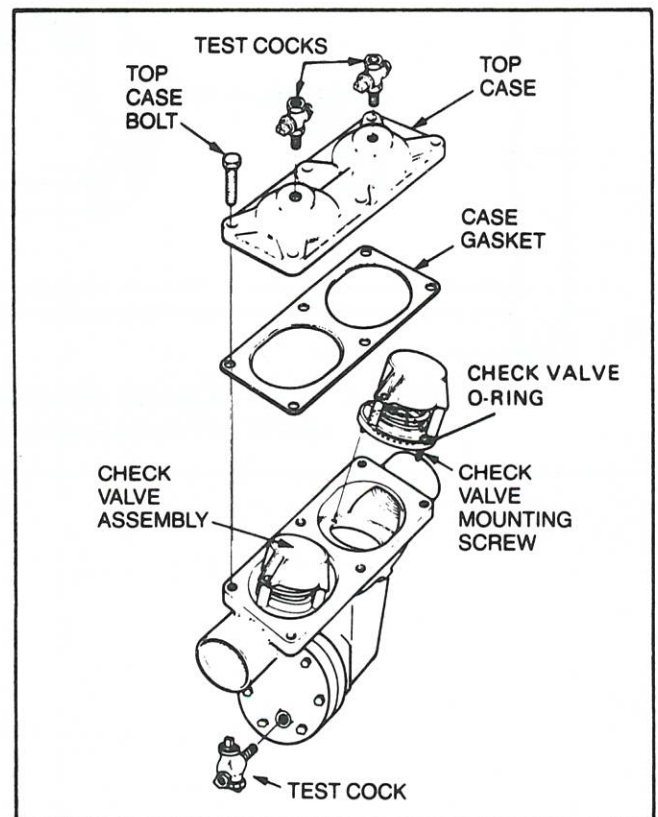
3/4" AND 1" CHECK VALVE ASSEMBLIES
